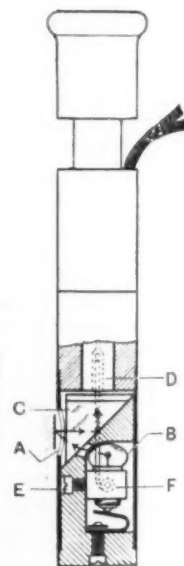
INSTRUMENT FOR THE INVESTIGATION OF THE INTERIOR CONDITION OF RIVET HOLES
